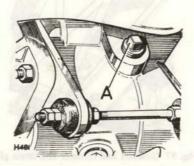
Gearbox oil filler/level plug A—Oil filler/level plug
